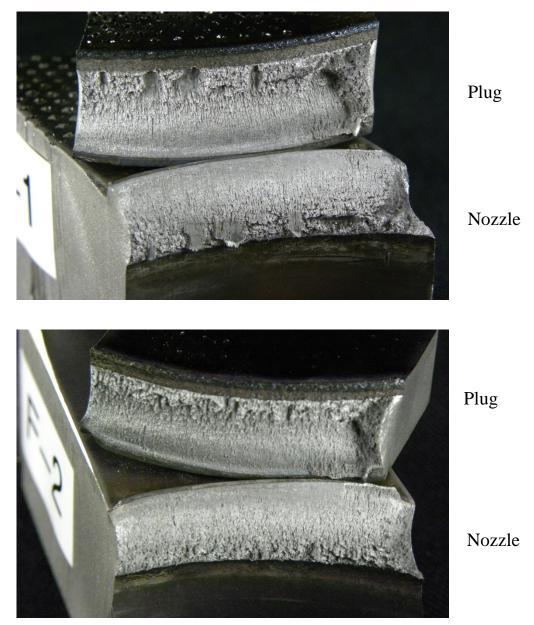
Macrophotographs of bending fracture test samples removed from nozzle/plug ID No. TN00275/WP04448, a) sample F-1; b) sample F-2 both test samples exhibit ductile fracture.
